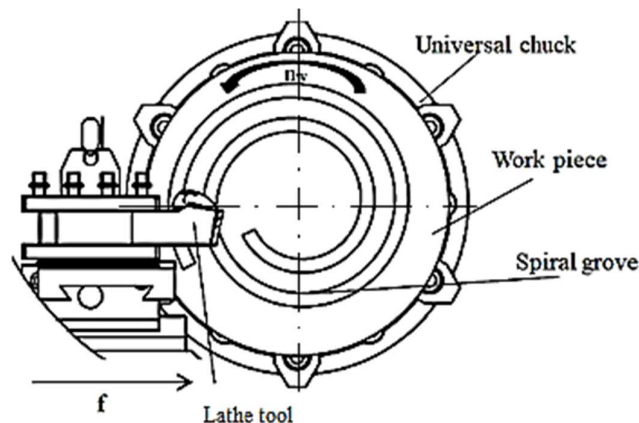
Machining a spiral groove on the flat surface of a disc type workpiece using a tool lathe on a universal lathe.
